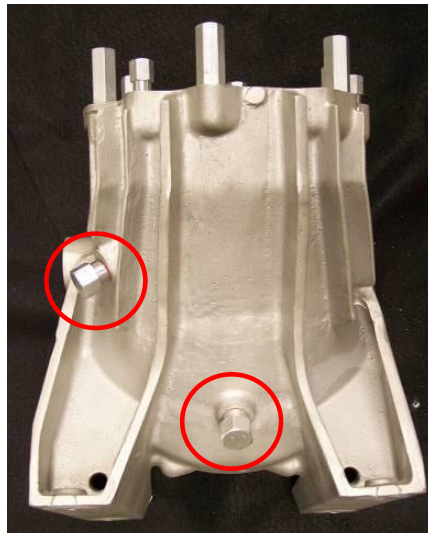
Threaded aluminum insert covers installed on the H-64 intermediate gearbox.
